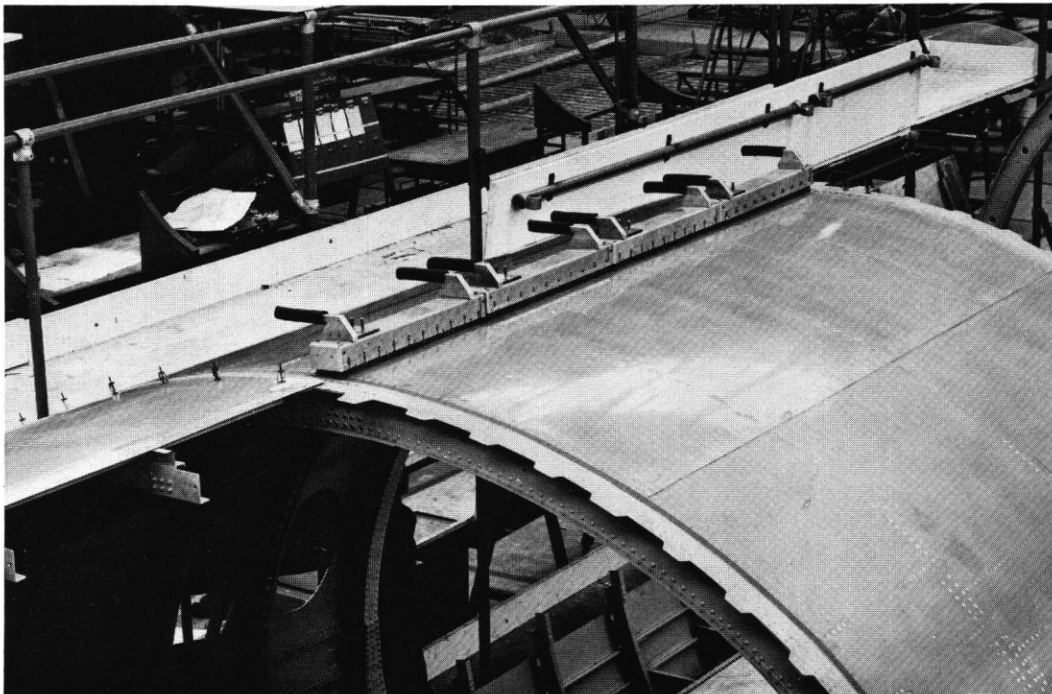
Curing of a longitudinal bonded fuselage joint under magnetic pressure prior to emplacement of the rivets. (Fokker)
